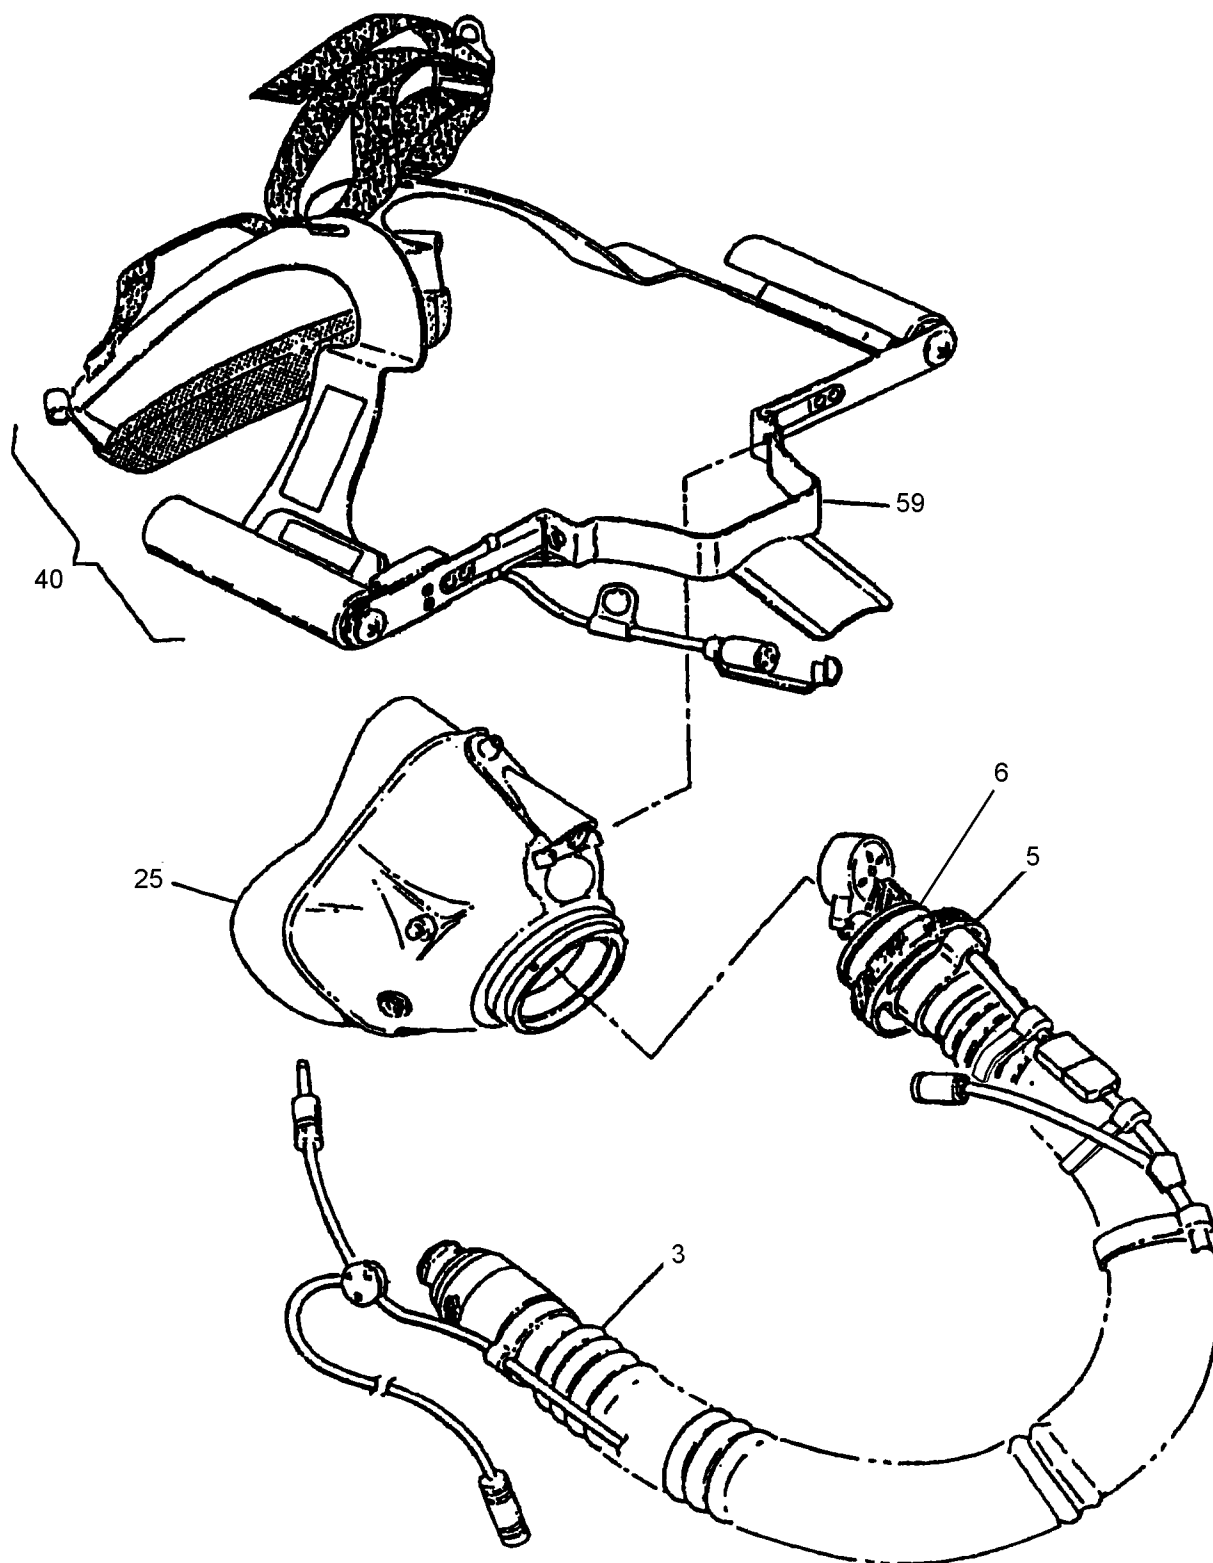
Folding, Quick-Donning Mask Assembly, Exploded View (Sheet 1 of 2)
